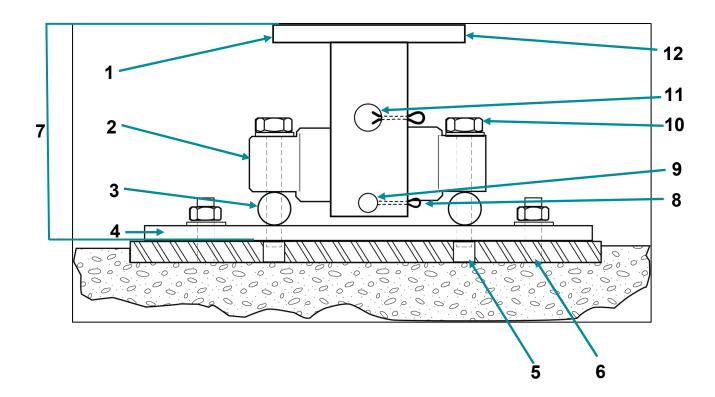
HIDSBMT Outline Drawing and Parts Identification
